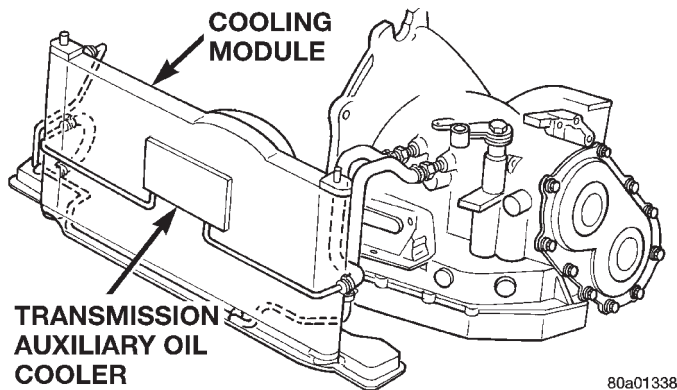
Auxiliary Transmission Oil Cooler—2.5L Engine
